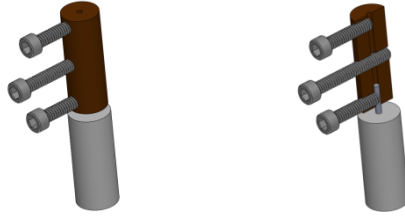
Picture showing SolidWorks assembly. Whole and partial views of the first setup. DC mass eccentric motor plus off-balance load which consists of three 2/56” screws and coupling. This assembly was designed to create a high vibratory effect to our system.
